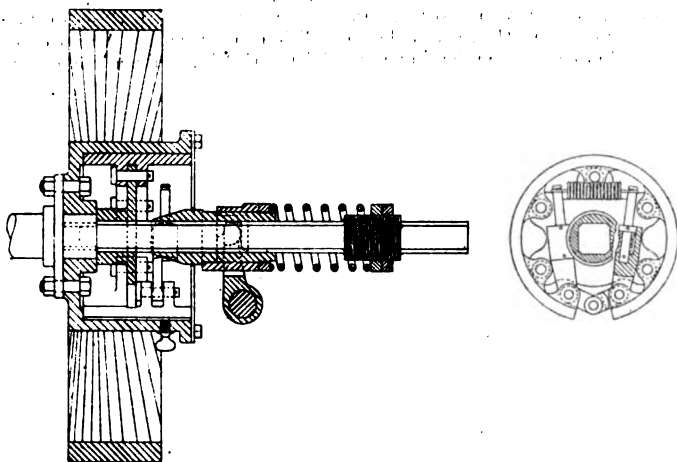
Sectional and End View of Clutch on Sunbeam Six-cylinder Car.
